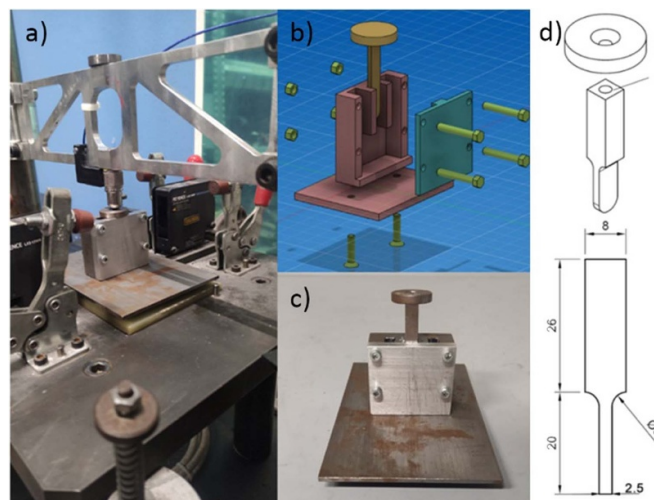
(a) Impact set-up for selective tangential impacts during tests. (b) Impact device assembly. (c) Assembled device. (d) Technical drawing of the impact device.
